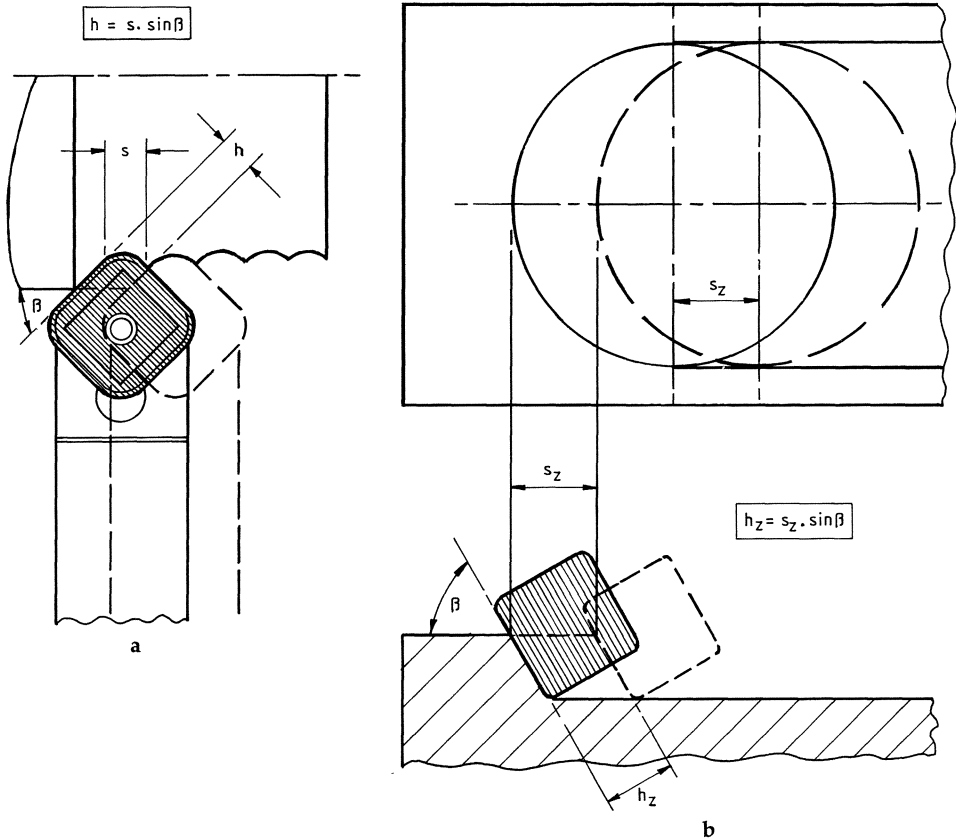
Chip thickness in a turning and b milling operations. [Courtesy of Seco.]
